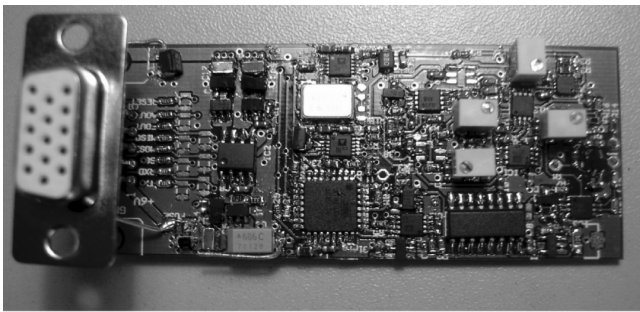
Interface electronic designed on a 4-layer printed board, dimensions 7cm x 3cm.
